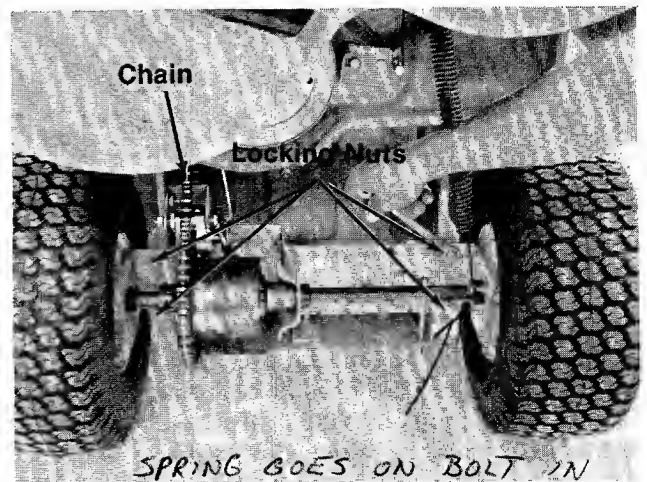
TRANSAXLE BRAKE 2nd SIDE
